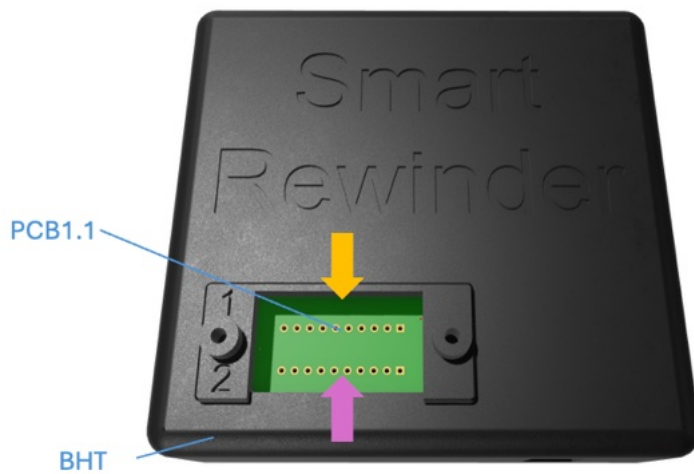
Main circuit board V1.0/2.0 housing "free-standing" assembly step 3.
